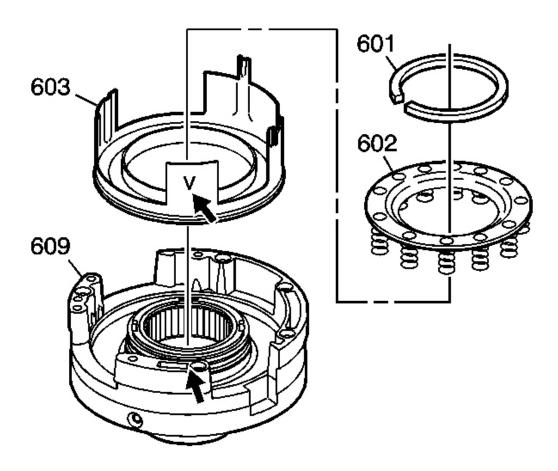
Assembling Fourth Clutch Piston Assembly Into Driven Sprocket Support Courtesy of GENERAL MOTORS CORP.
